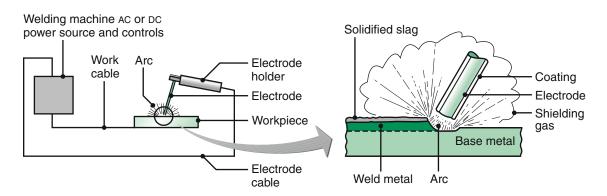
Schematic illustration of the shielded metal-arc welding process. About 50% of all large-scale industrial-welding operations use this process.
